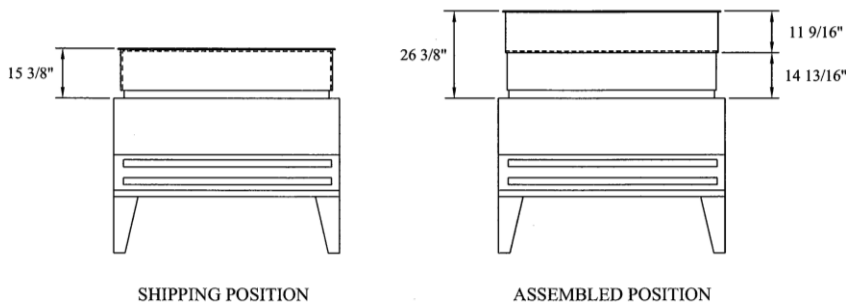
STANDARD 22" & 42" LEG ASSEMBLY
